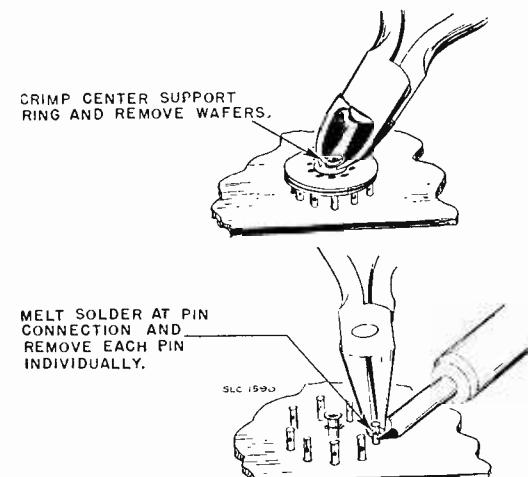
Method of replacing a wafer type tube socket. A, Crimp the center support and remove the wafers; B, Melt solder at pin connection and remove each pin individually.
